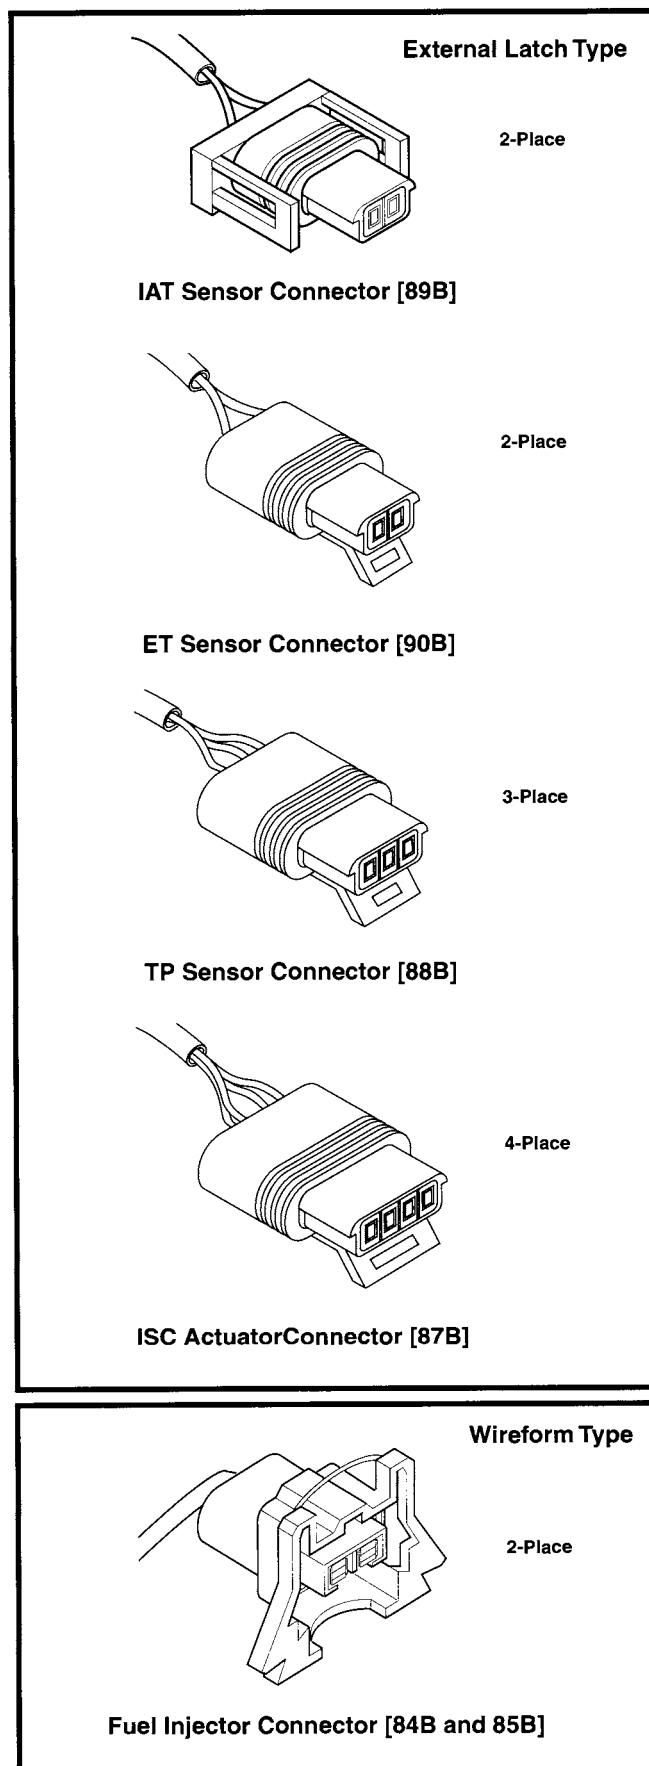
Packard Pull-to-Seat Terminal Connectors (Socket Sides)
